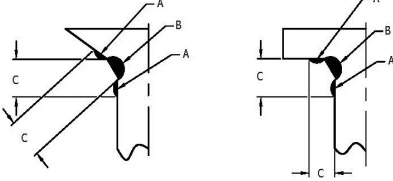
FILLET COLD WORKING DISTORTION
